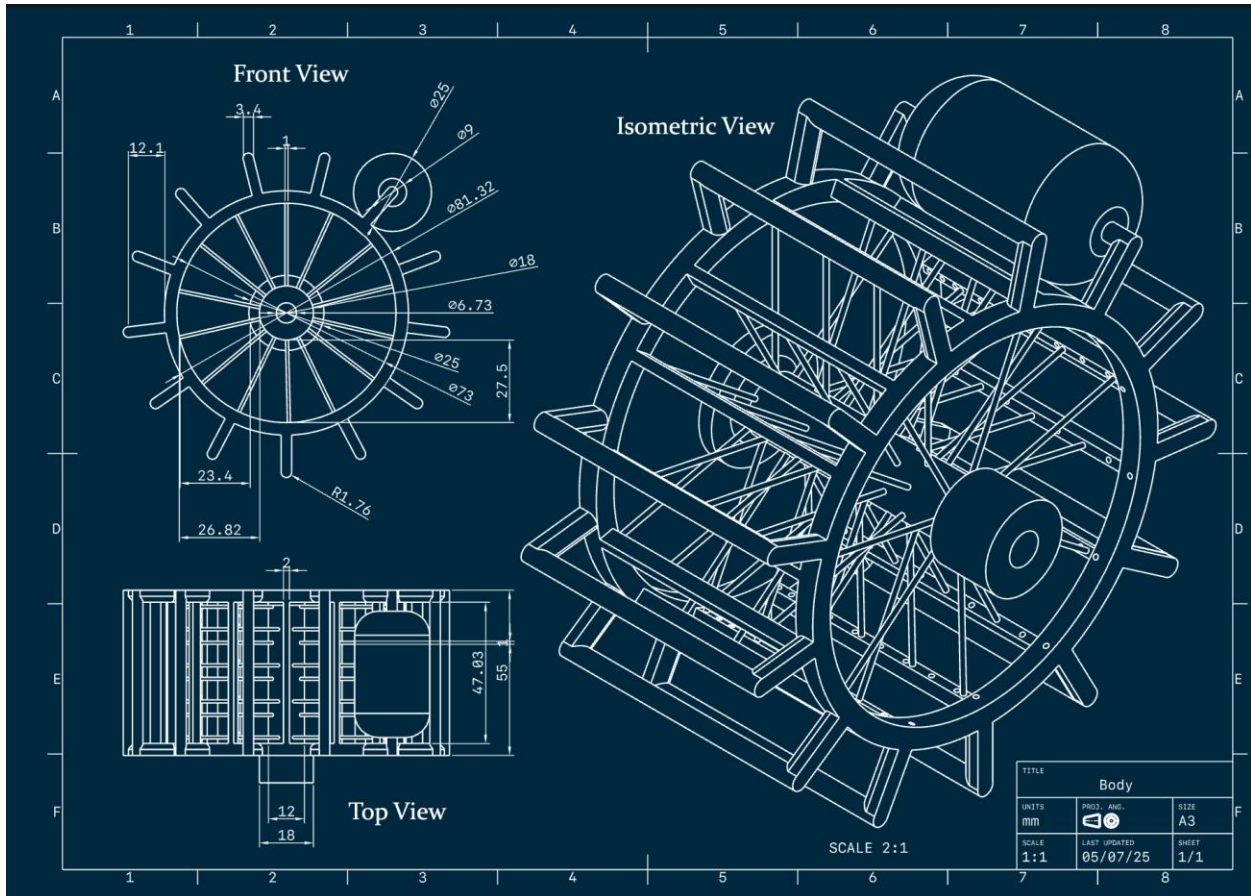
CAD drawing of the design generated, showing all the component dimensions
